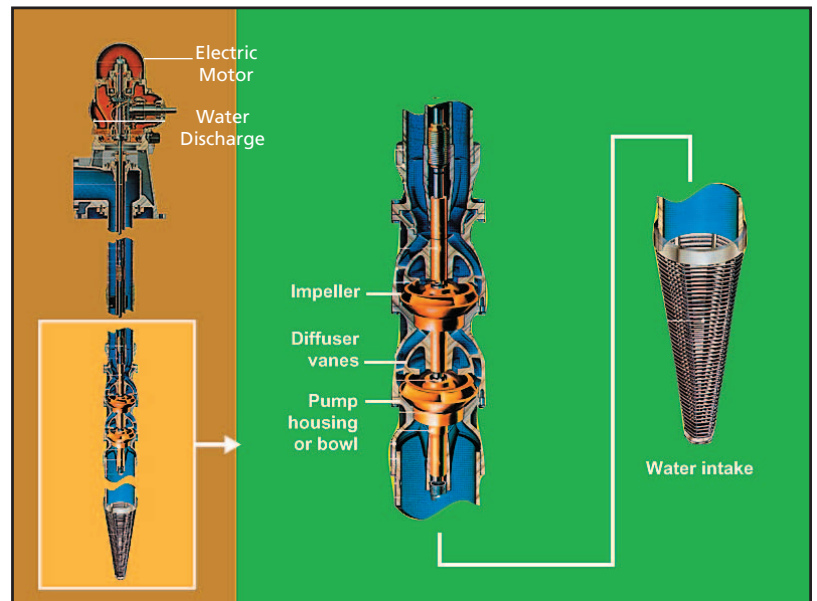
Primary components of a turbine pump and other types of pumping plants: water discharge point and electric motor or alternatively an engine (upper left), shaft connecting motor to pump housing (left center), pump housing containing two stages of impellers (center), and water intake point (far right).
